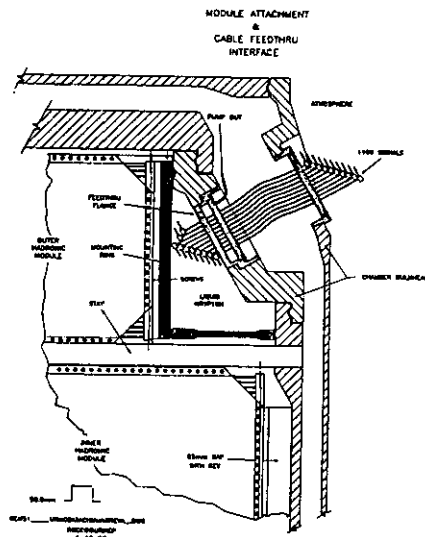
Detail of inner barrel crystal near the feedthru, showing the ring on which the outer hadronic modules will be mounted.
